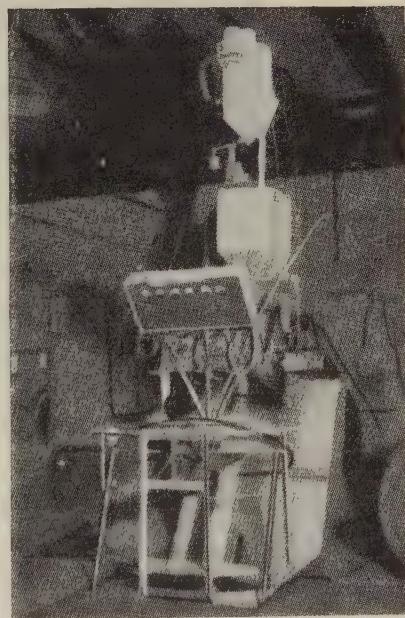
RS 3 f installation for welding tyres as altered for submerged arc welding.
